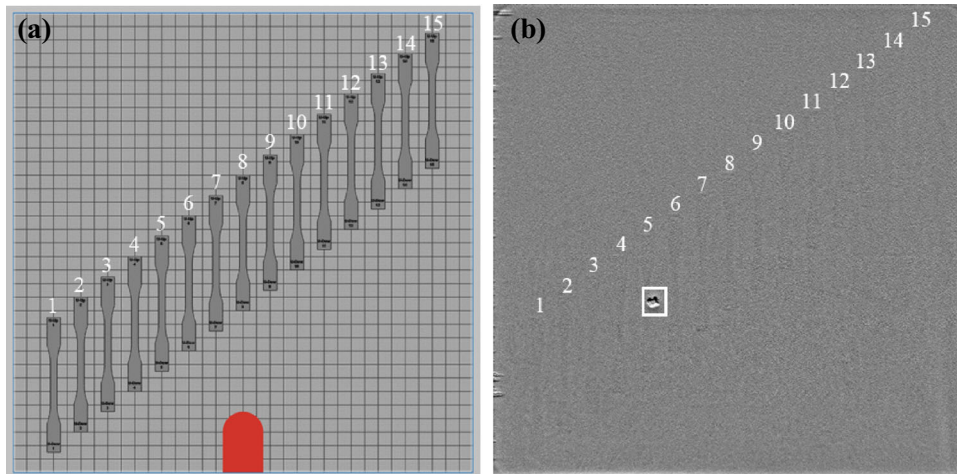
(a) Build job layout with DIN EN ISO 527 tensile test specimens type 1BA, with enlarged shoulders (total specimen is 100 mm long), all specimens start at 4 mm. (b) Monitoring image with critical point flaw in build job 7 on specimen 5.
